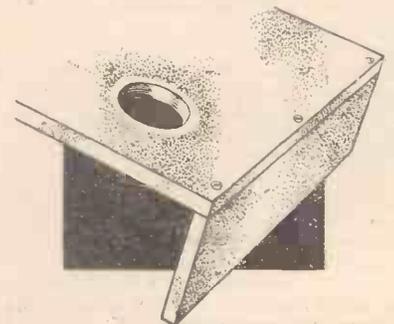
It is wise, after making the valve-holder holes in a metallised chassis, to file or scrape away the metallising round them so as to prevent possible short-circuiting of the sockets.
